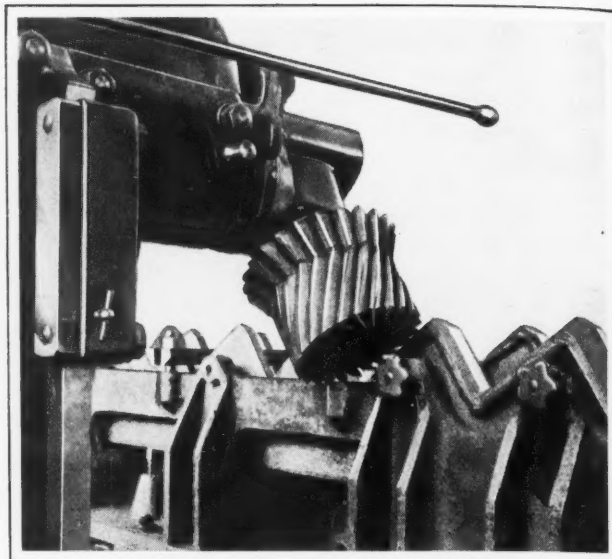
Special Cutter Designed for Simultaneously Milling Three Surfaces on Notched Castings
